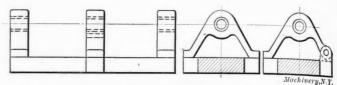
Boring Jig with Removable Bearing in the Center, adapting it to Different Sizes of Work of Similar Character.
